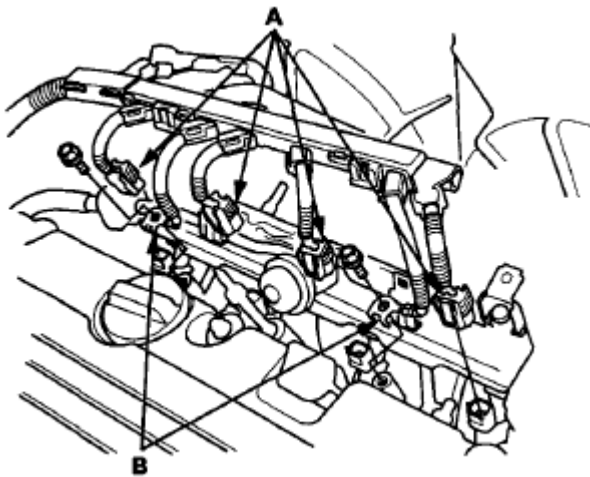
Identifying Fuel Injector Connectors And Ground Cables
